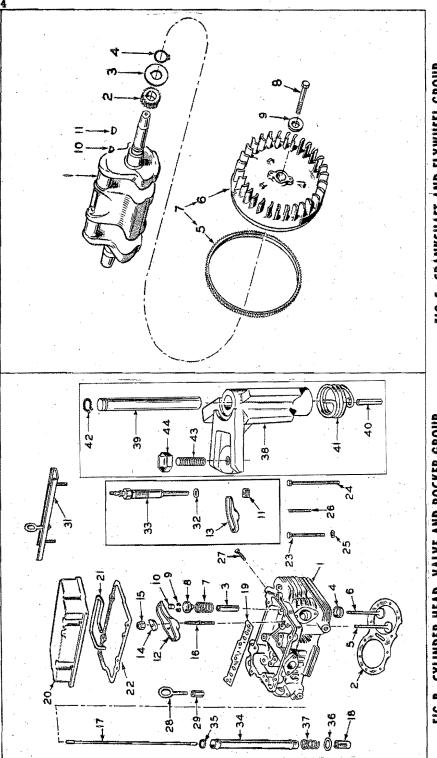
FIG.C. CRANKSHAFT AND FLYWHEEL GROUP
